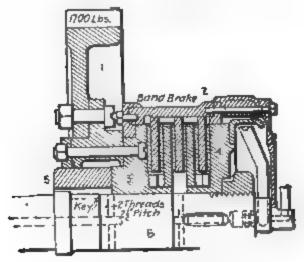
Sellers Type Disc Friction Brake for Boat Crane Full Load Torque = 21,900 In. Lbs.
